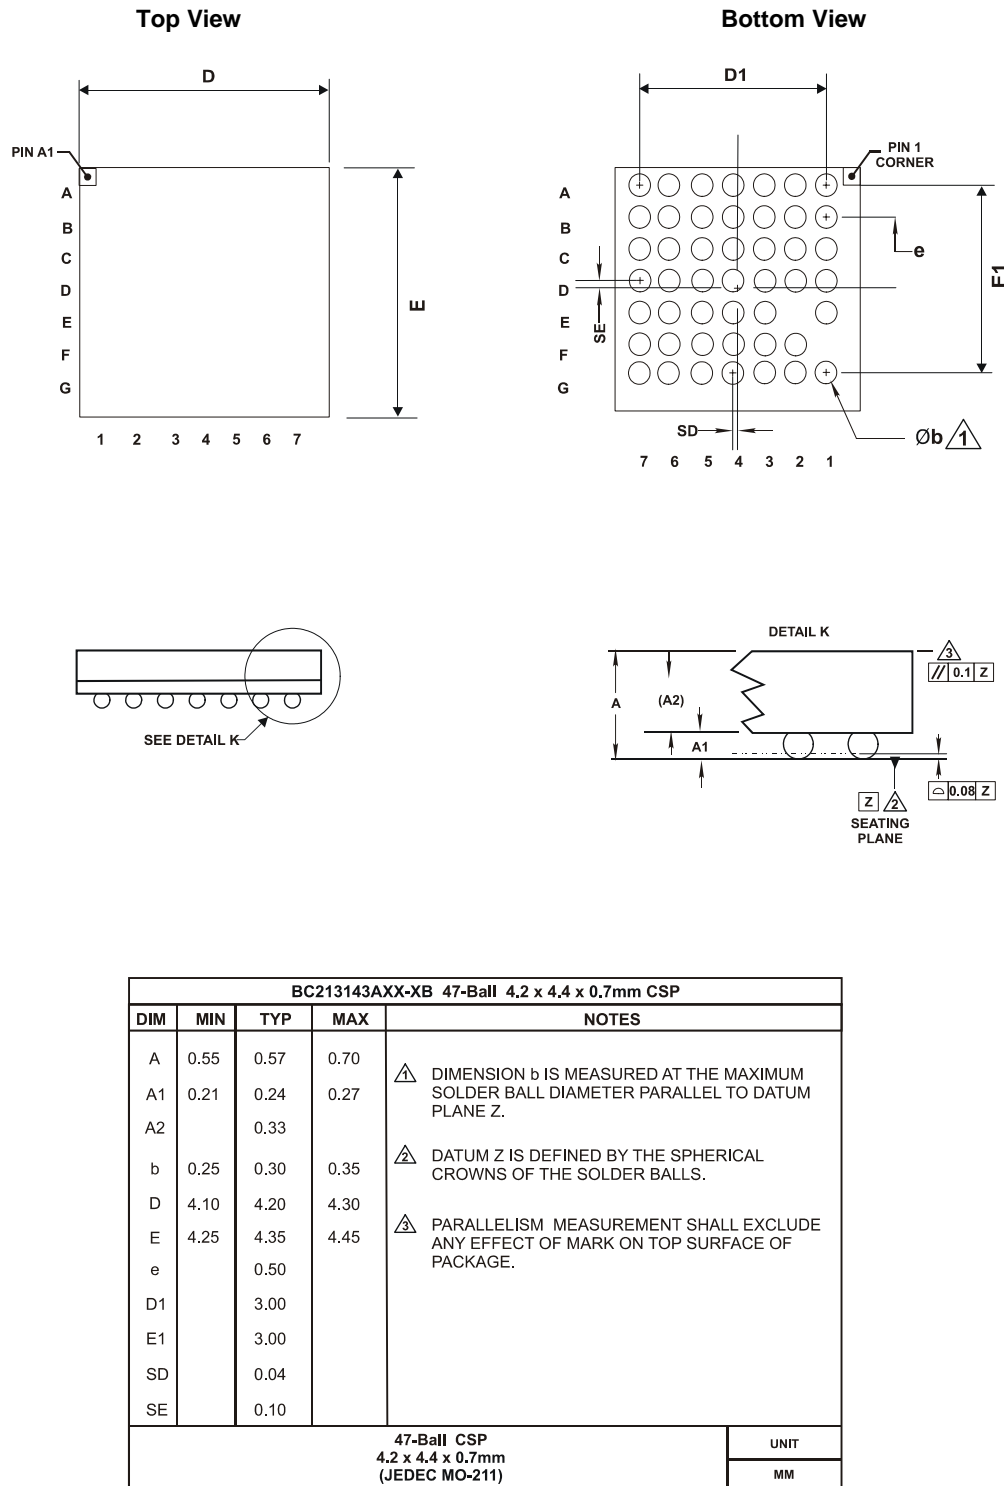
BlueCore2-ROM CSP Package Dimensions
